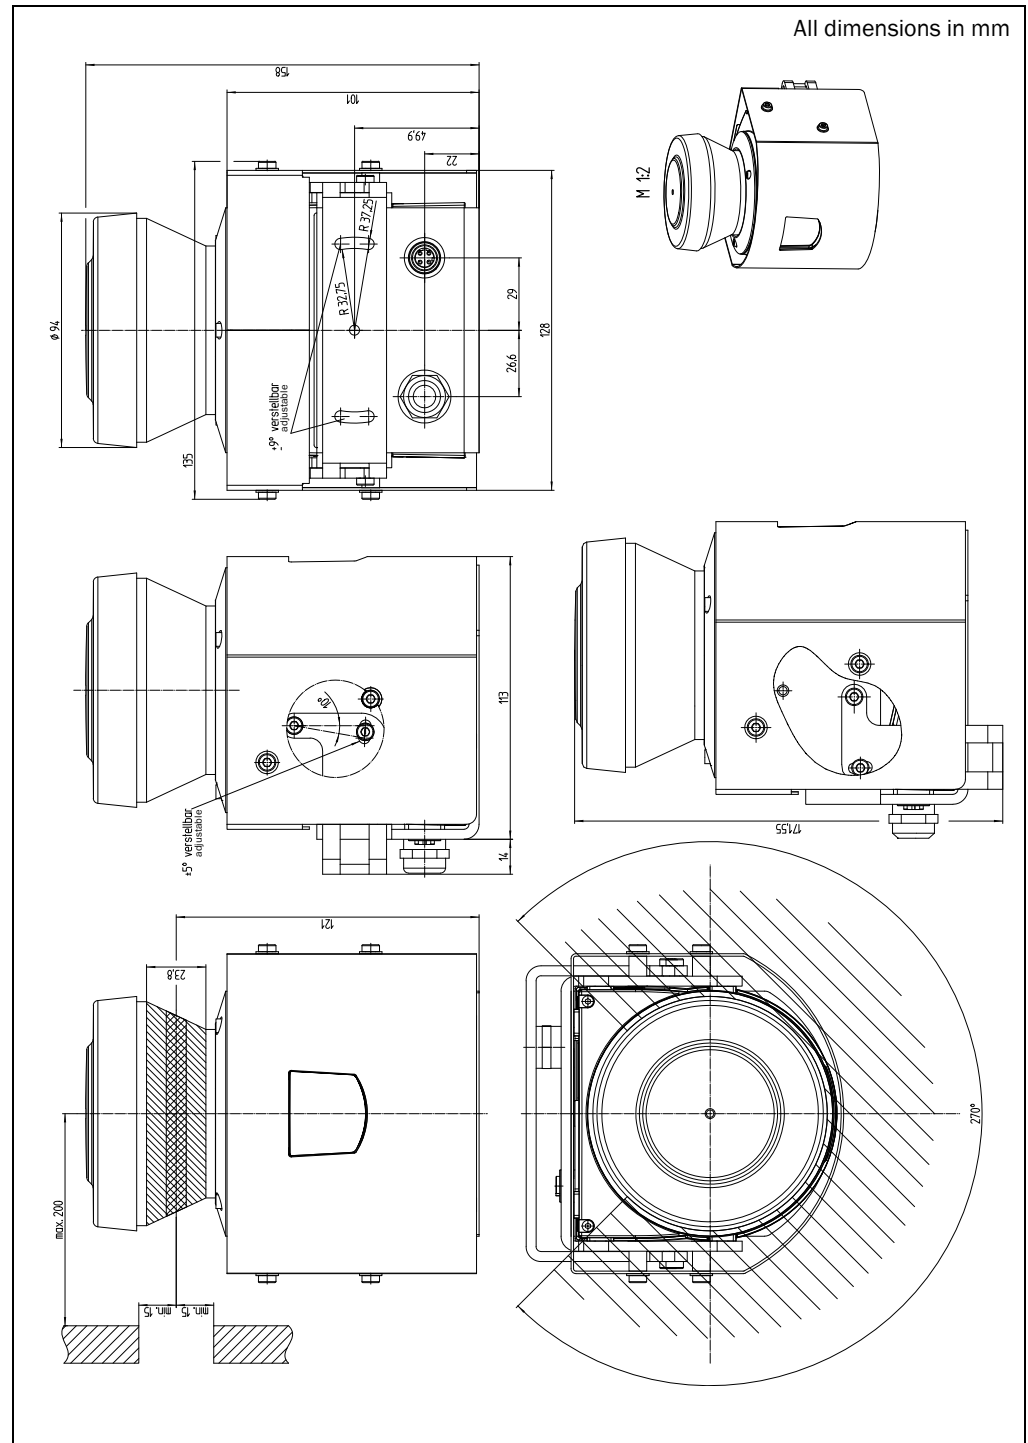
Dimensional drawing LMC12x VdS with VdS mounting kit 1
